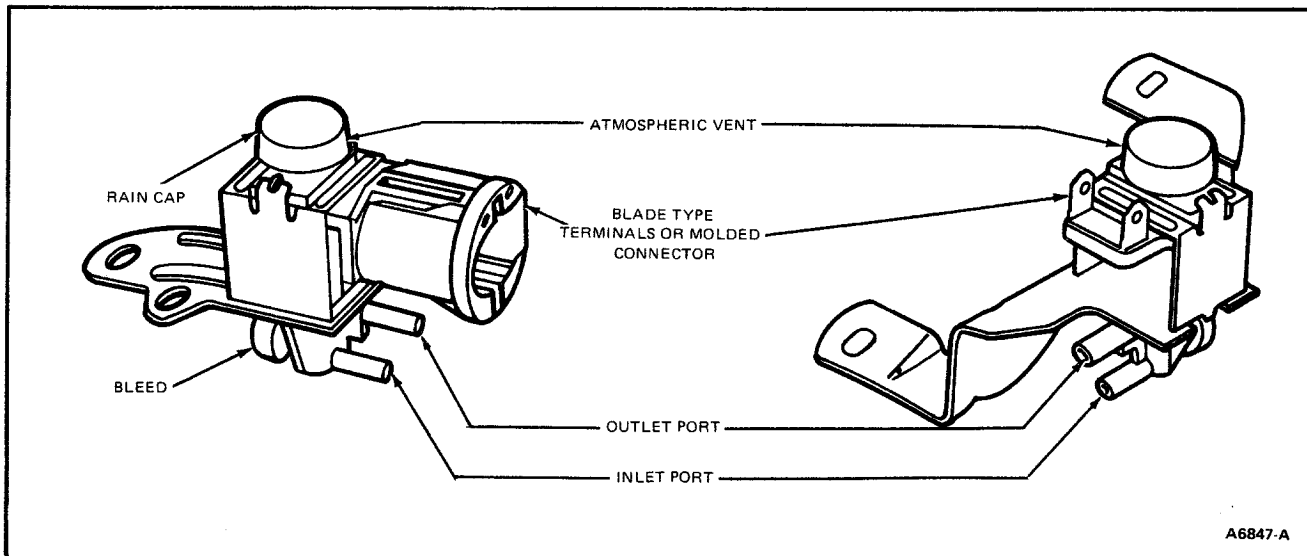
Typical Solenoid Valve Assembly—Normally closed
